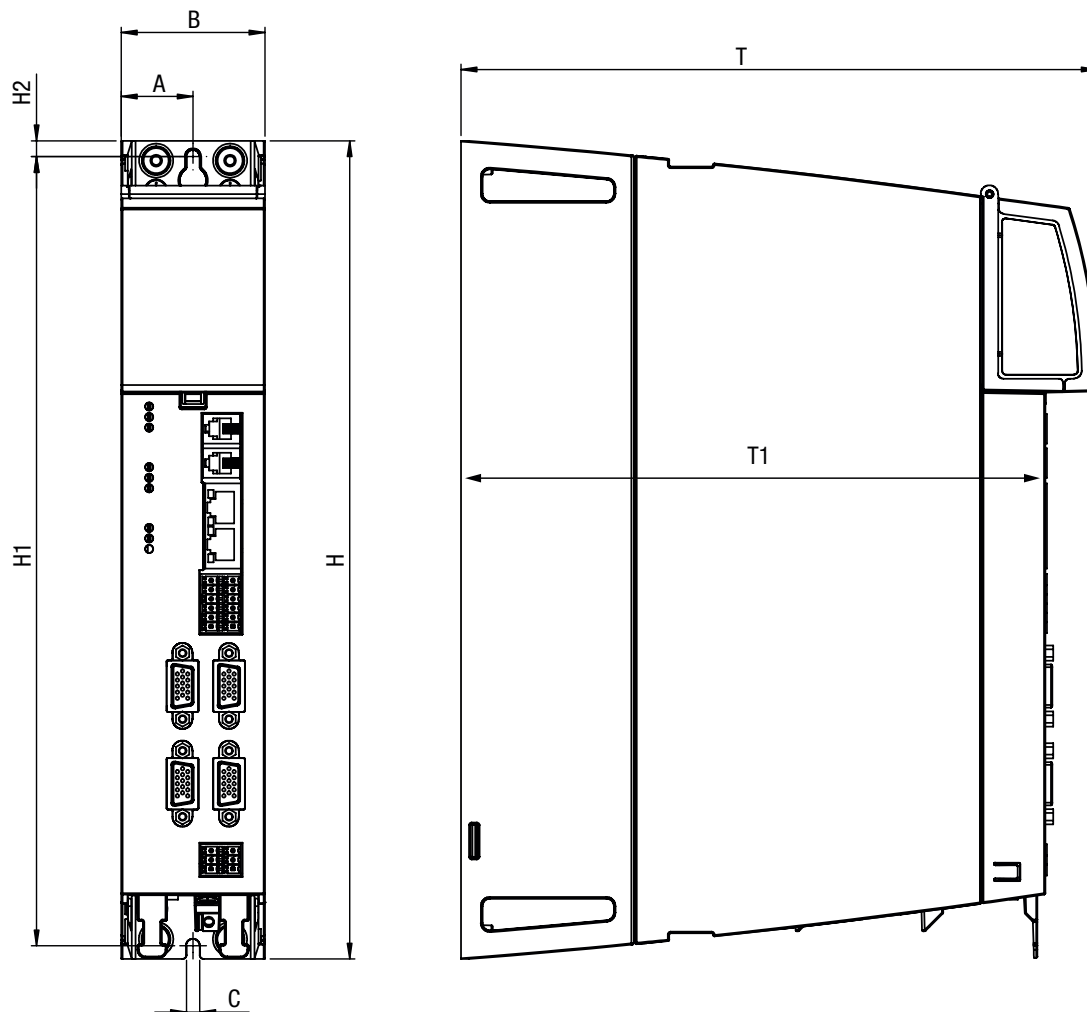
Dimensional drawing JM-3000 servo amplifier BG1 (dimensions see Table 2.1)
